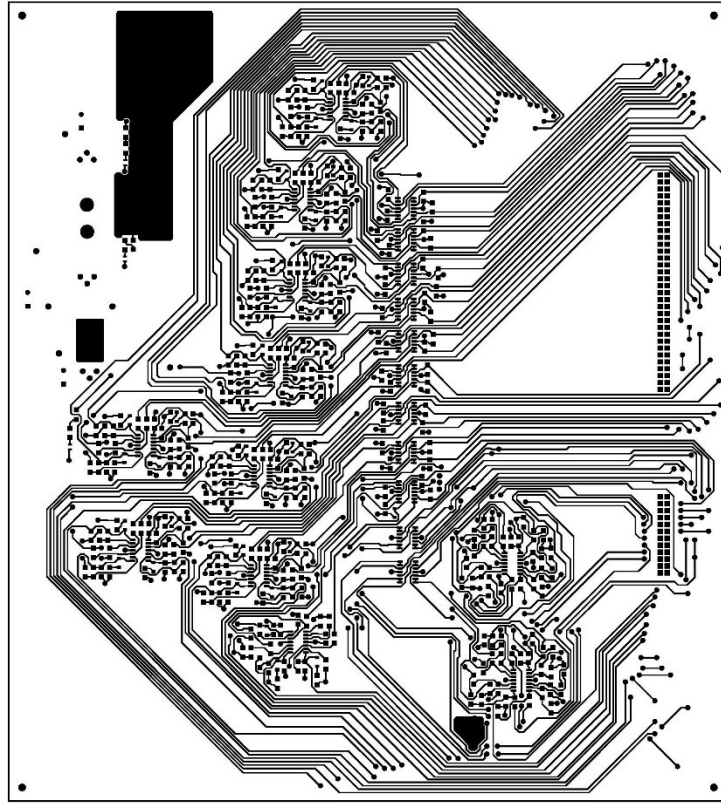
MOSFET Gate Control Board PCB Mask Top
